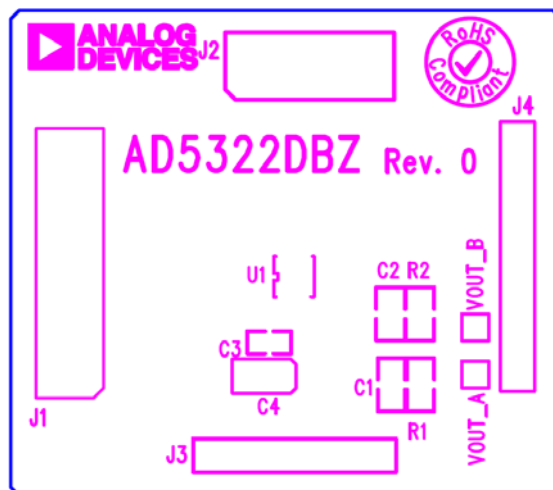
EVAL-AD5322DBZ Daughter Board Component Placement
